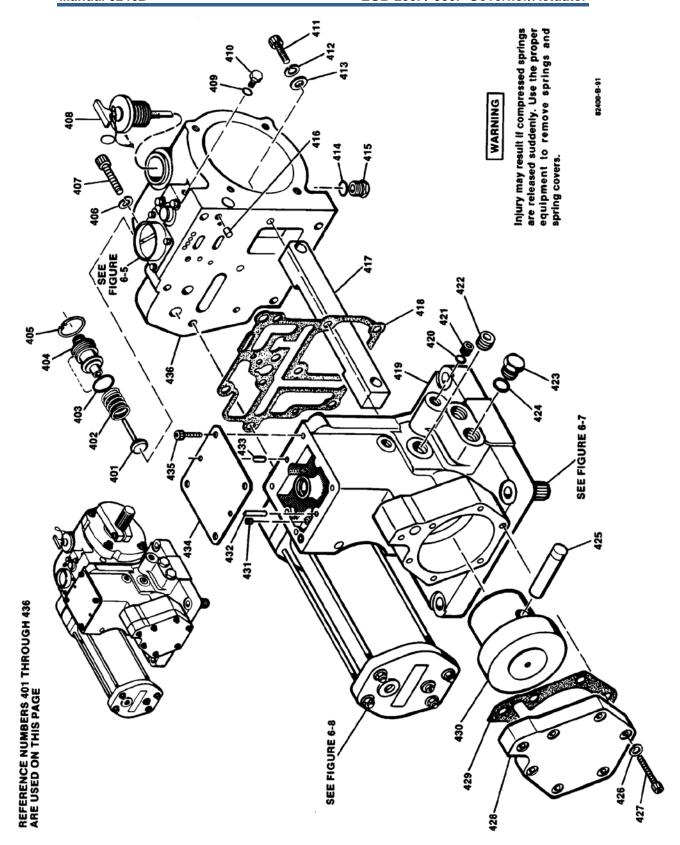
Parts for the EGB-200P Governor/Actuator
